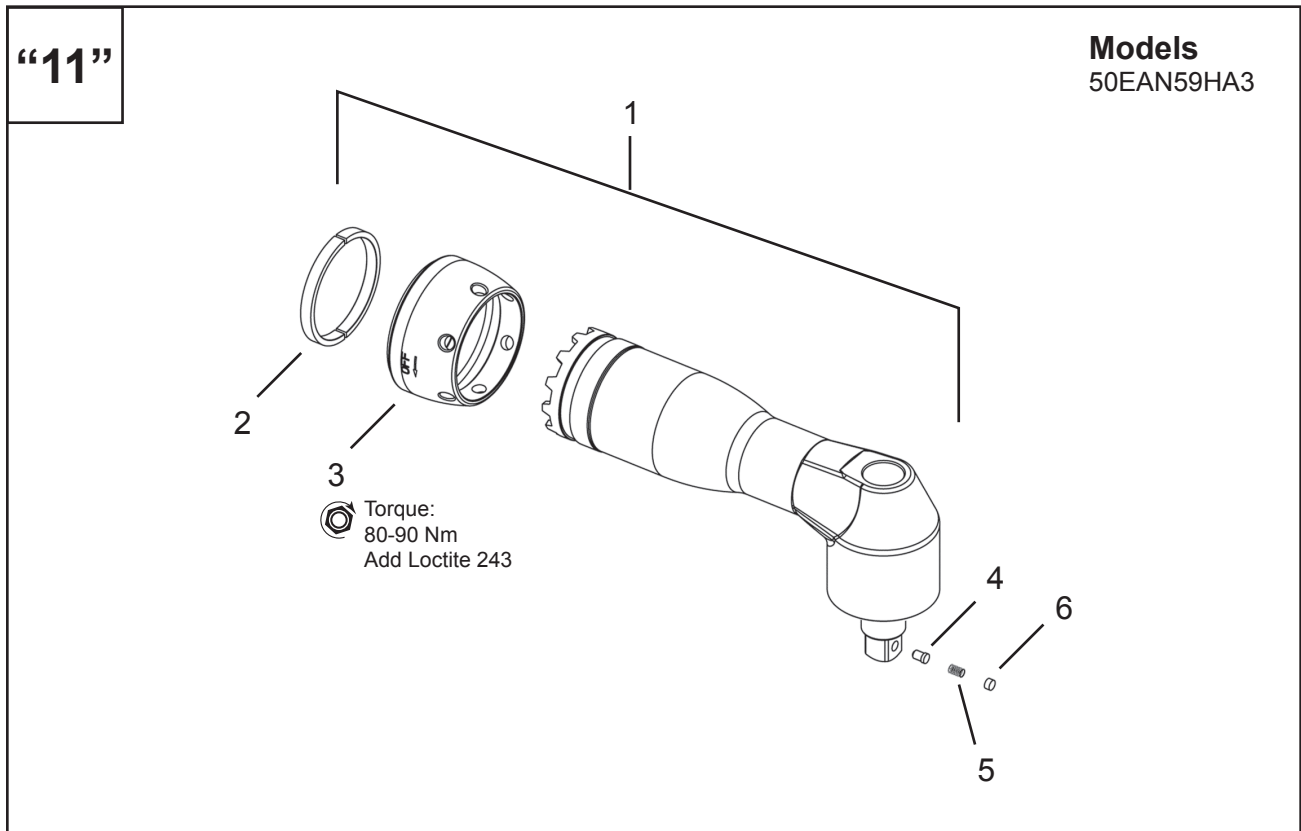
”: 302173PT Angle Head Attachment (HA3)
